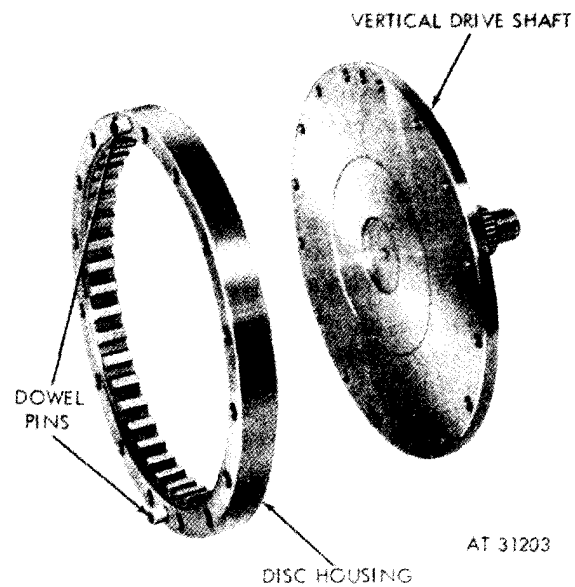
Separating or positioning vertical drive shaft and disc housing (mechanical clutch).
